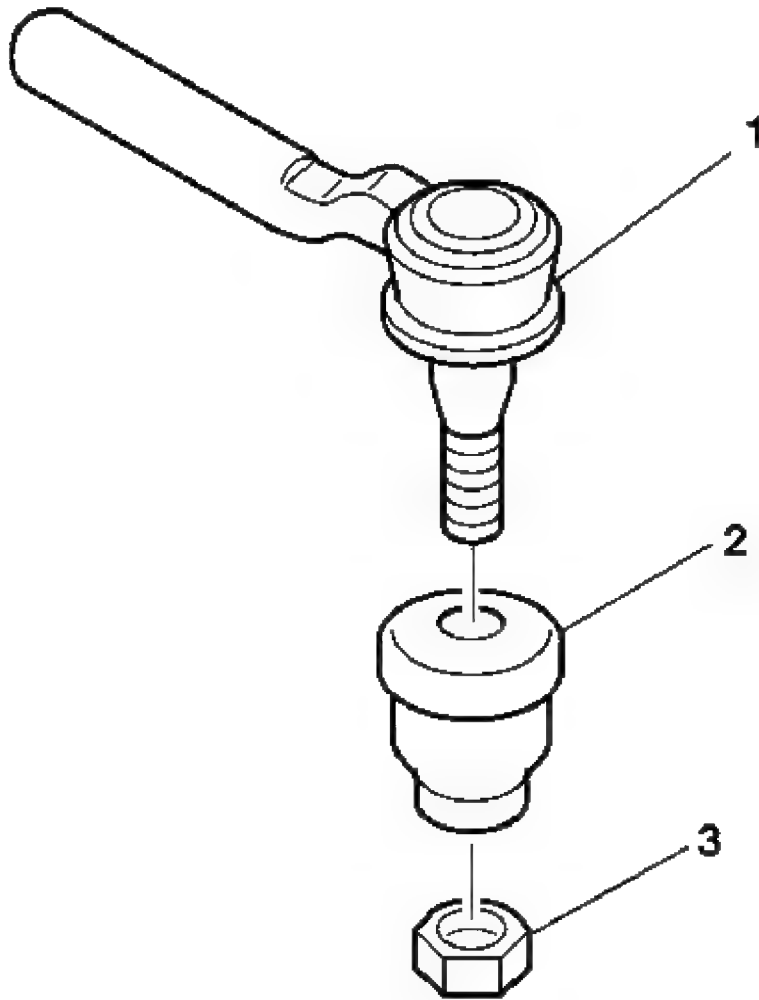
Installing Tie Rod Seal To Outer Tie Rod Assembly
